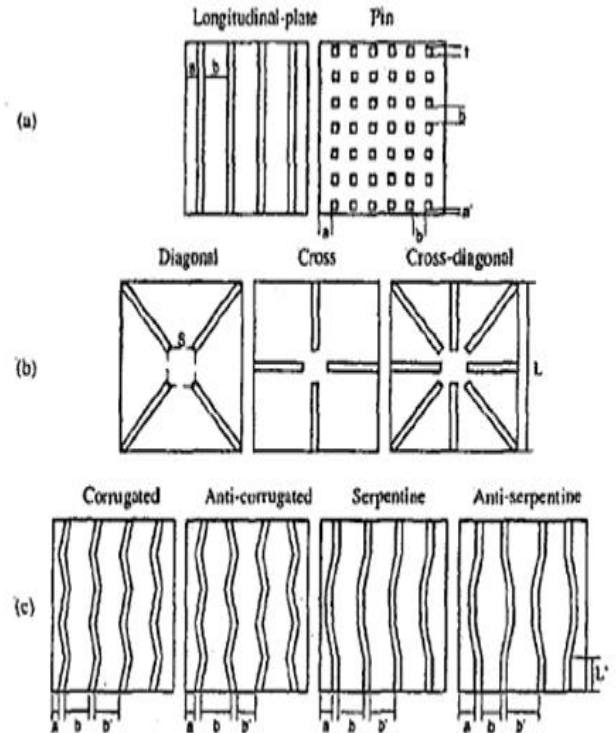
a) conventional heat sinks b) fluted heat sink c) Wavy fin heat sink.
